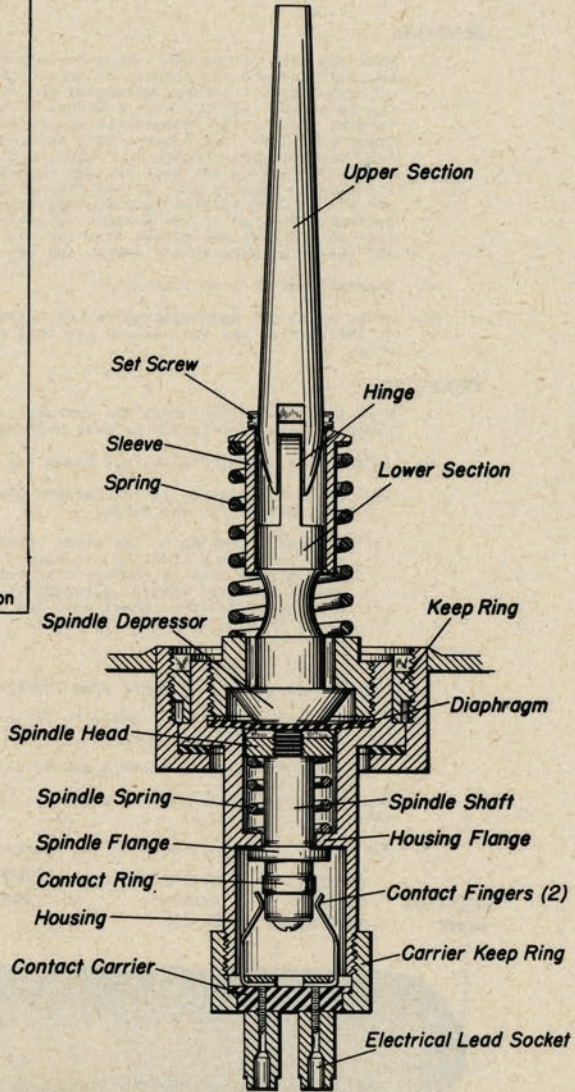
Mine Type JI, Switch Horn, Sectional View
